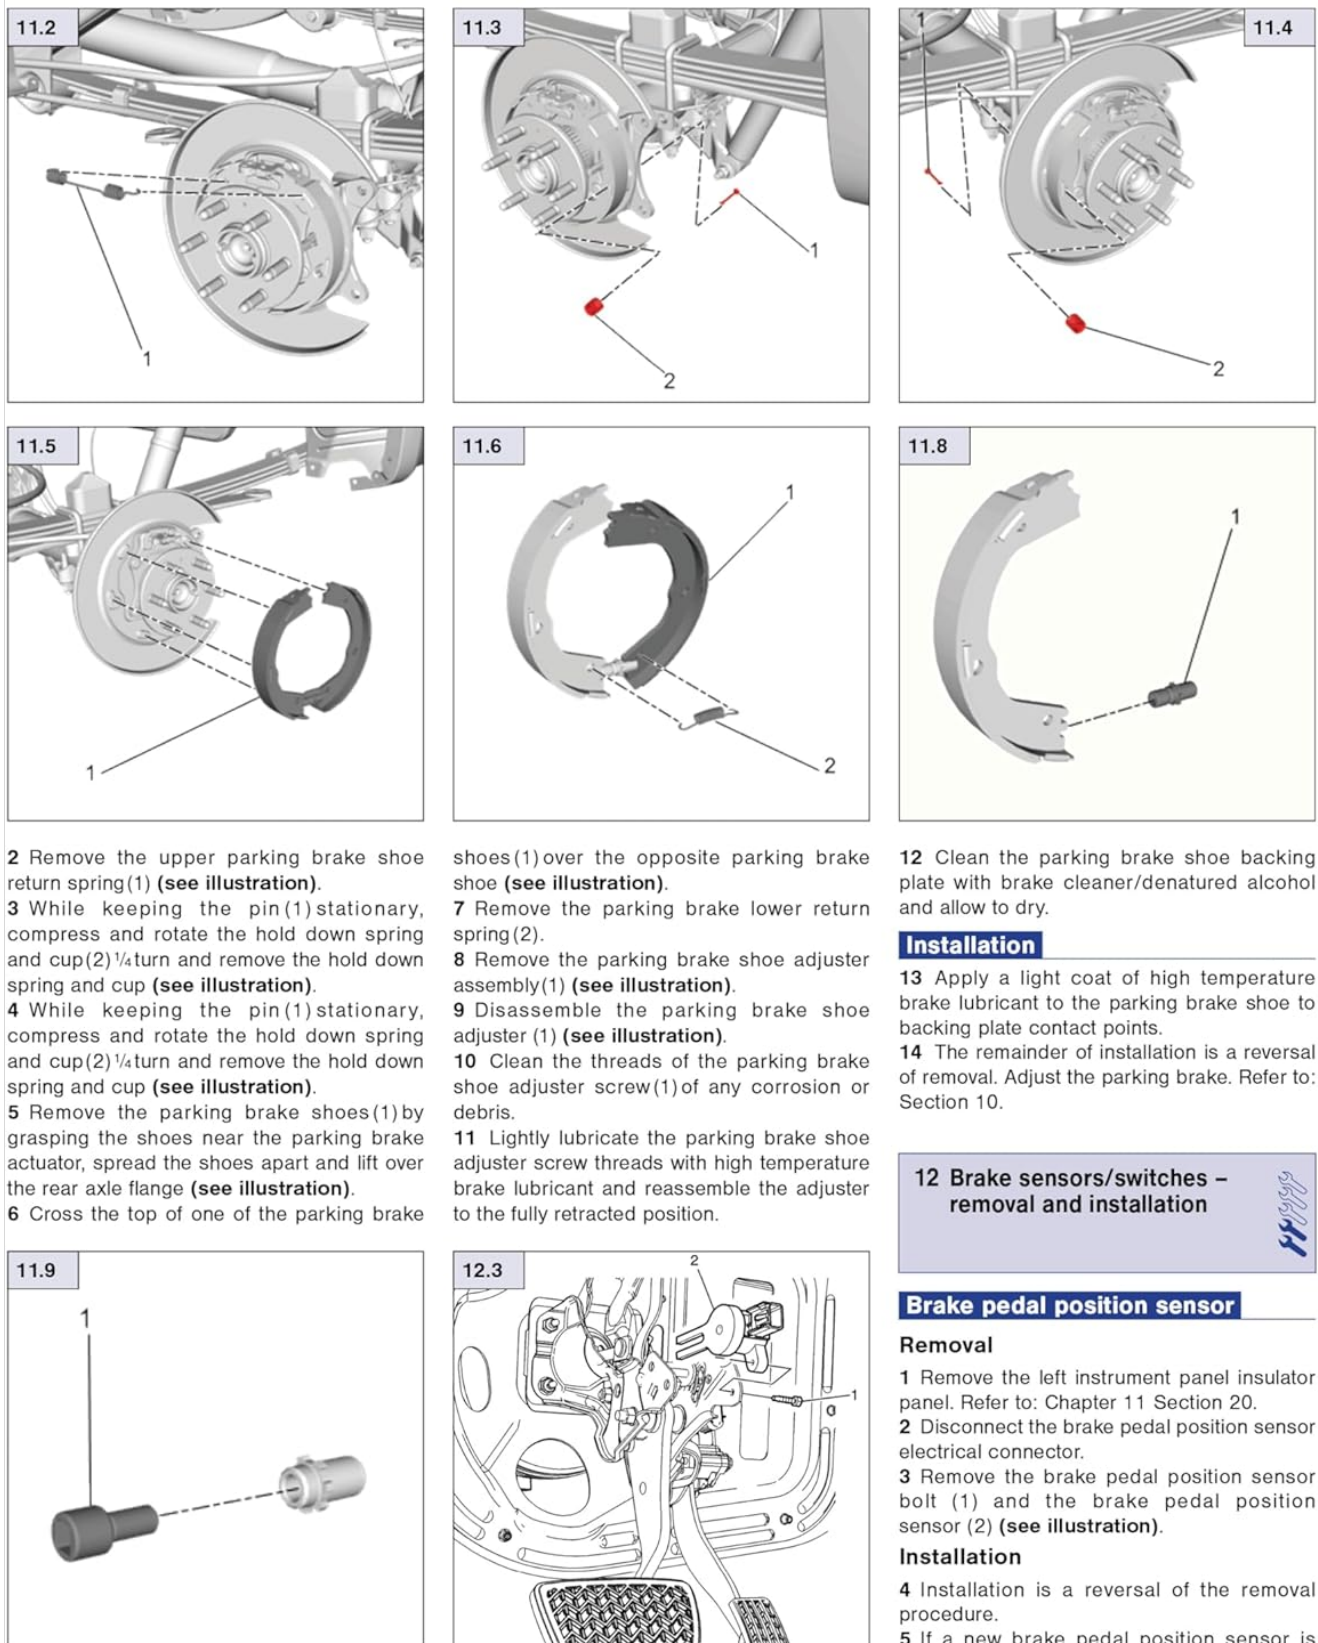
Illustrations of various braking system components, including drum brake assembly and brake pedal position sensor.
